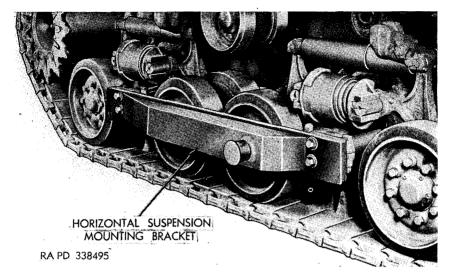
Horizontal suspension mounting bracket installed—bulldozer M1A1.
